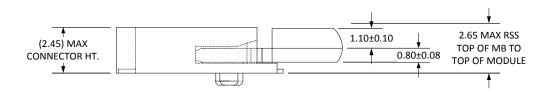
H2.5-S1 - Stack-up Top Mount Single-sided Module for 1.20 Maximum Top-side Component Height and with Higher Clearance above Motherboard
